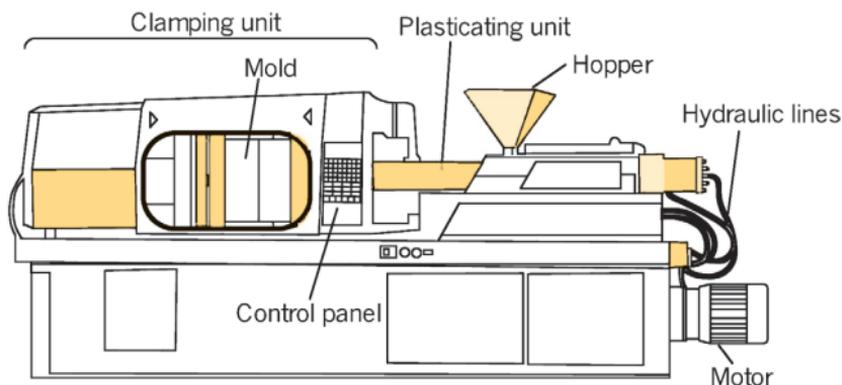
Schematic of an injection molding machine. See Figure 2.7 for a more detailed representation of the machine
